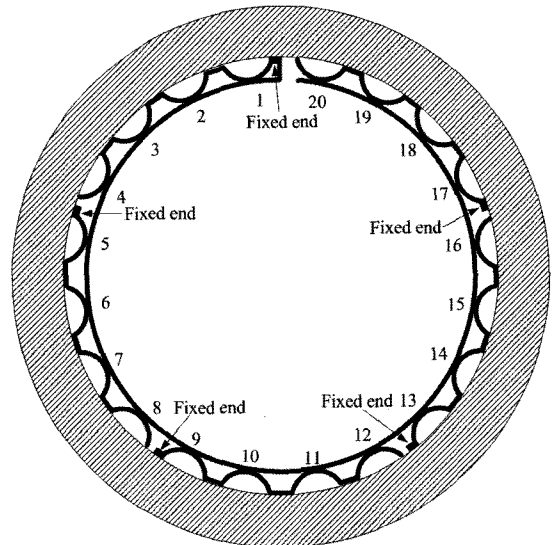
Foil bearing consisted of 5 bump foil strips.
